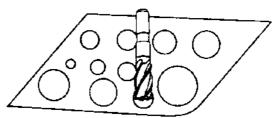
Checking of cutter diameter with plug gauge (in case of cutters with an uneven number of cutting edges, e.g. with three or five cutting edges)
